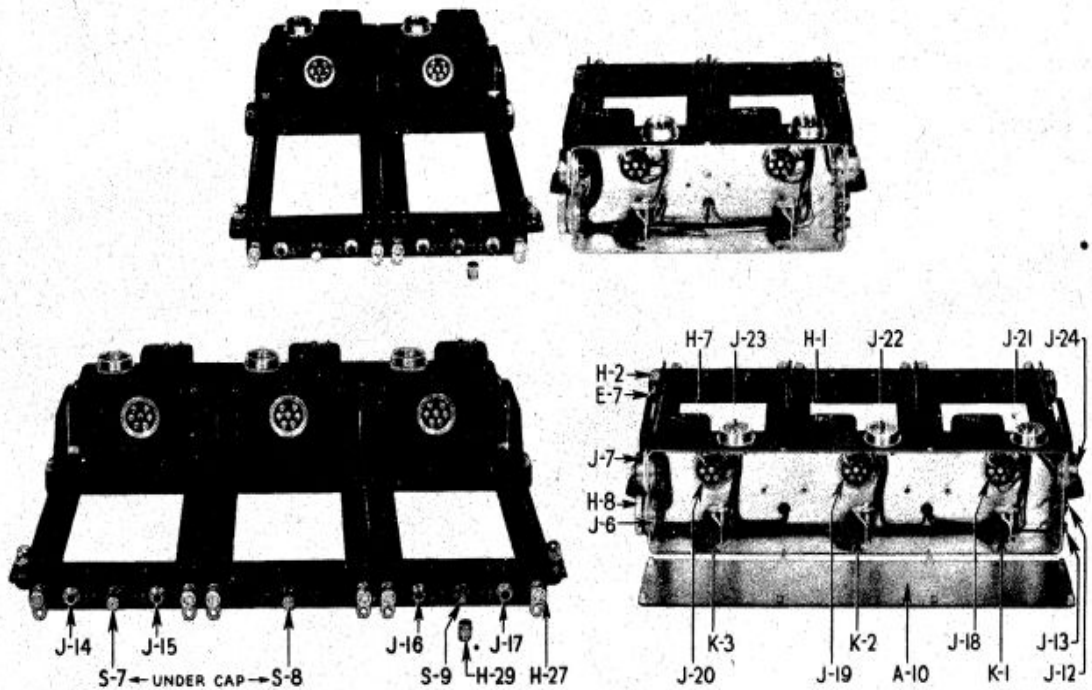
TYPE CBY-46110 (2-UNIT) AND TYPE CBY-46149 (3-UNIT) RECEIVER RACKS, FRONT AND REAR VIEWS OF EACH WITH COVER REMOVED
